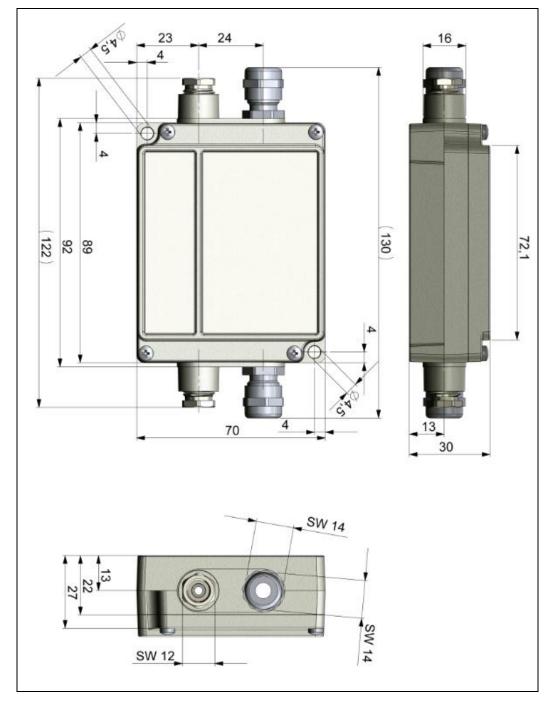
Industrial/stackable PIF (Process Interface) – electronic box, control box shutter, dimensions [mm]
